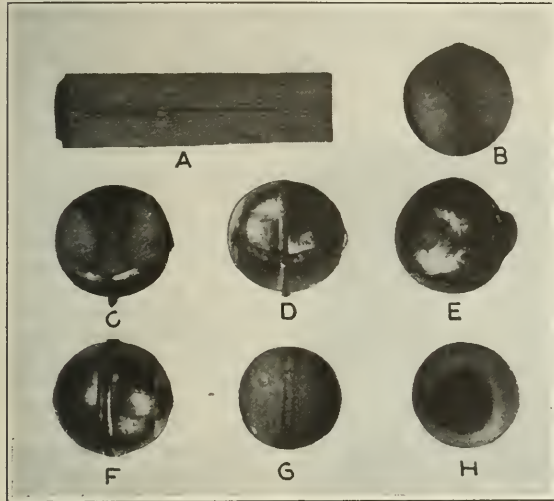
(A) Section of Steel Stock, showing Lamellar Structure; (B) Cross-section of Cold-header Ball Blank, showing Distortion of Steel Structure; (C) Cross-section of Header Cracked Ball Blank; (D) Ball Blank shown in Cross-section at (C); (E) Cold-header Ball Blank with Large Fin; (F) Perfect Cold-header Ball Blank; (G) Etched Ball, showing End Grain of Steel at Equator; (H) Etched Ball, showing End Grain of Steel at Pole
